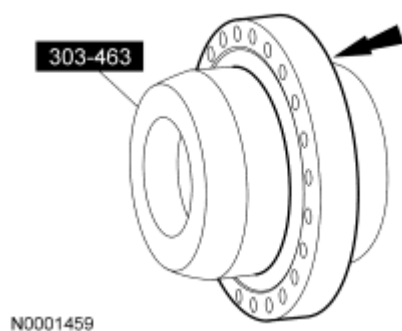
Locating Camshaft Oil Seal On Special Tool
